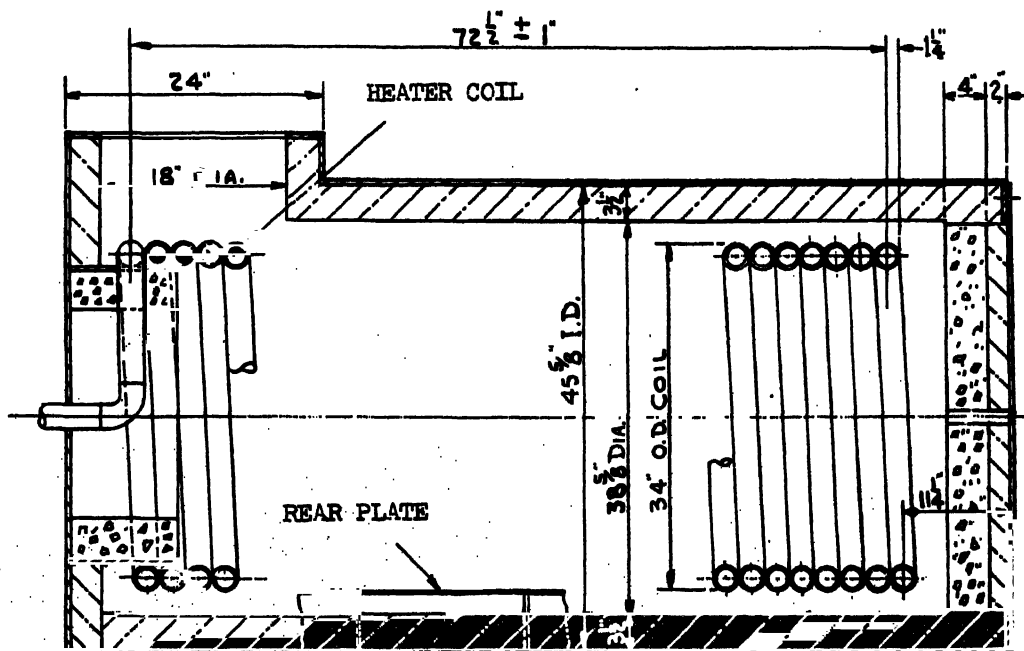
INTERNAL ASSEMBLY OF HEATER
